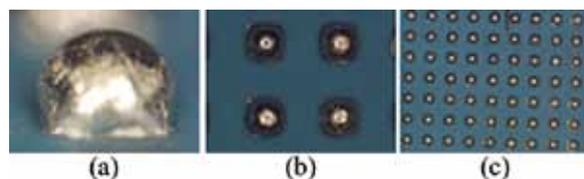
Optical pictures of the solder bumps at prepared optimized printing conditions (a) side view of a single bump, and, (b) and (c) top view of the solder bump array.
